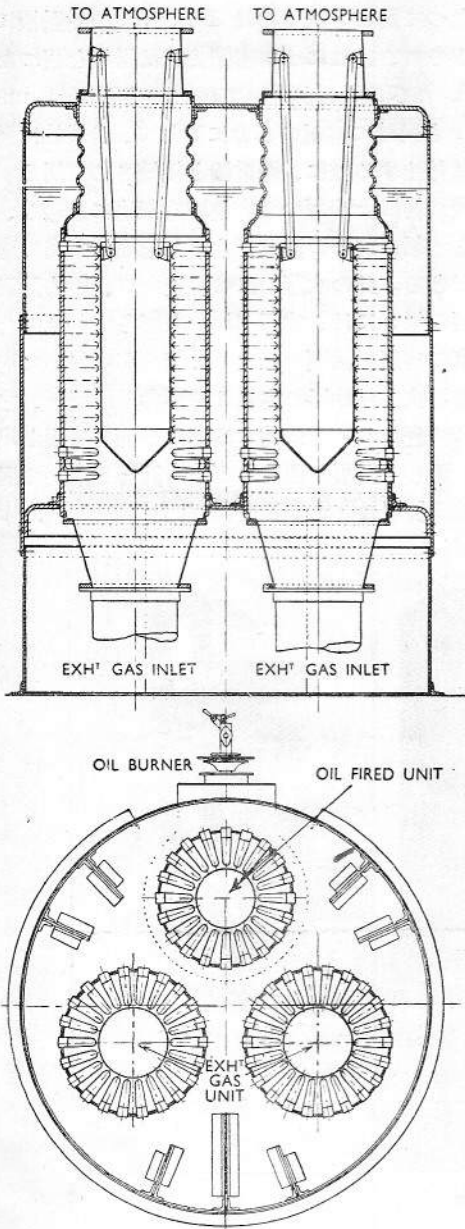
The Triplex-type boiler for twin-screw ships, with three heating units.
